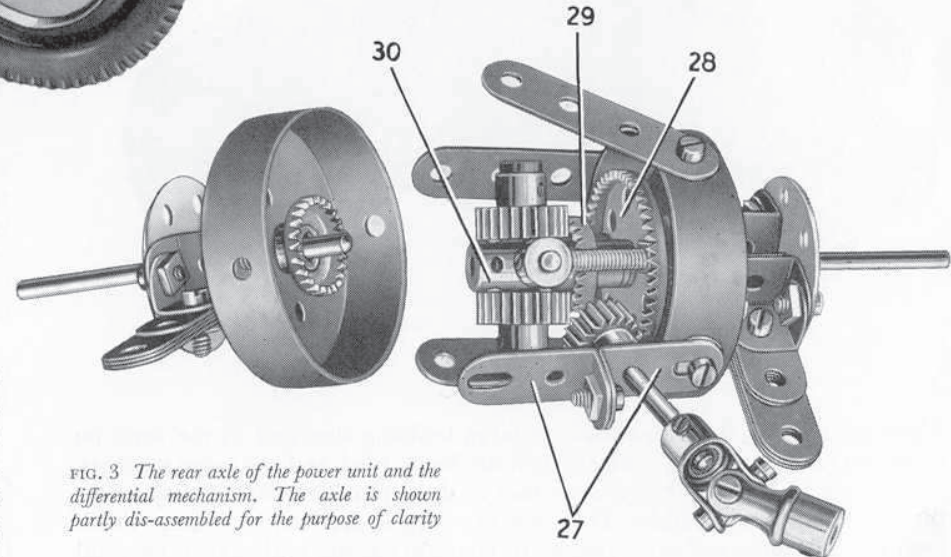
The rear axle of the power unit and the differential mechanism. The axle is shown partly dis-assembled for the purpose of clarity
